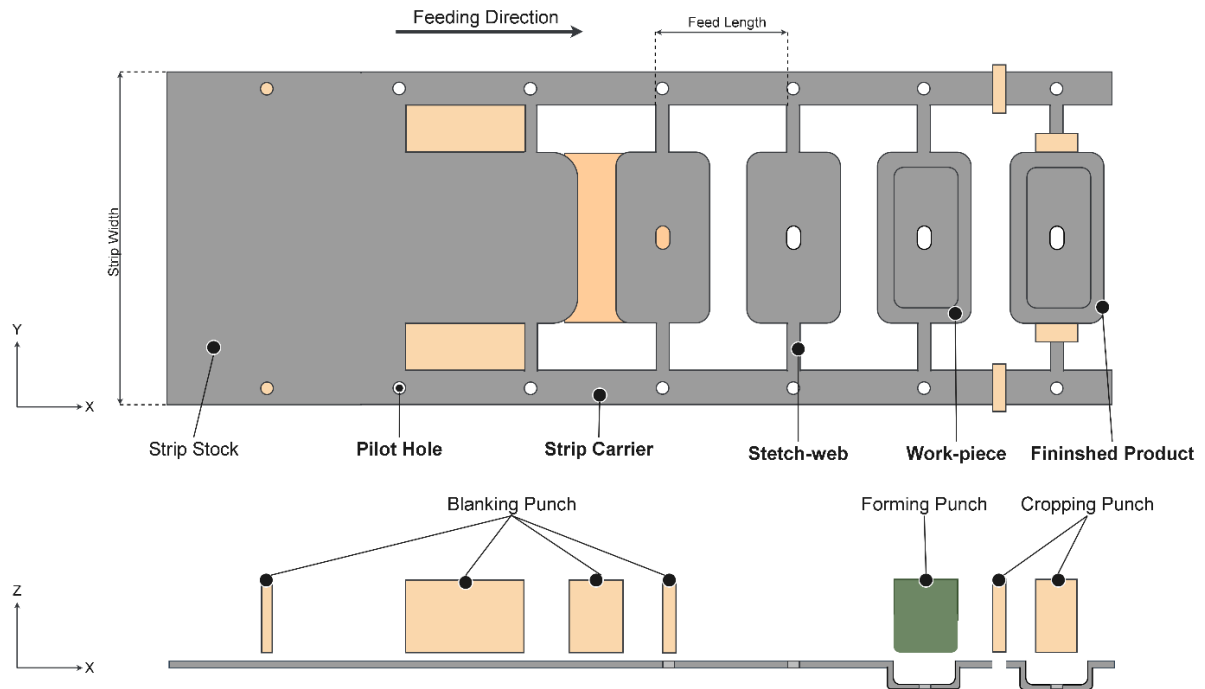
Top and side view of a sheet metal strip undergoing multiple operations in a progressive die operation. First, the blanking punches removes scrap material from the strip and create pilot holes. The remaining sheet metal 'blanks' are formed into cups with the forming punch. Finally, the finished product is removed from the strip by the cropping punch.
